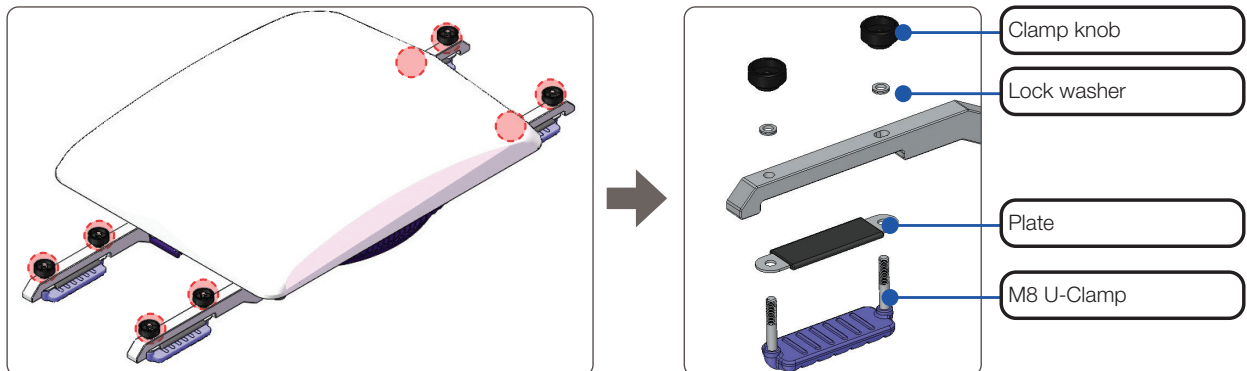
Loosening Clamp Knobs of the Mount Adapter
